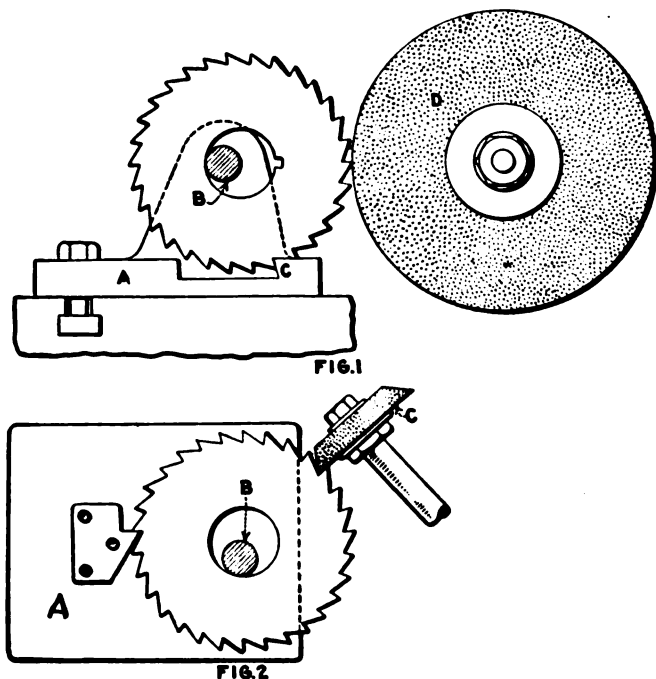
FIXTURE FOR GRINDING CUTTER TEETH. FIG. 2—MODIFICATION FOR GRINDING FACE TEETH
